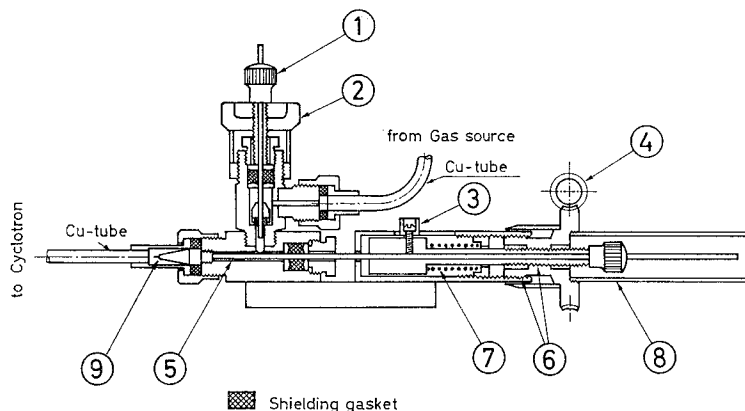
Needle valve. 1. Shaft chuck, 2. Stop valve, 3. Guide, 4. Worm, 5. Needle valve shaft (1.4 mm in diameter), 6. Differential screw (pitch of 0.115 mm), 7. Spring, 8. Cover, 9. Needle.
